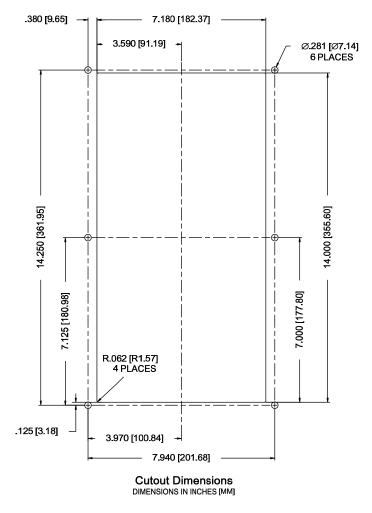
, TC Barrier Cabinet Cutout and Drill Dimensions
